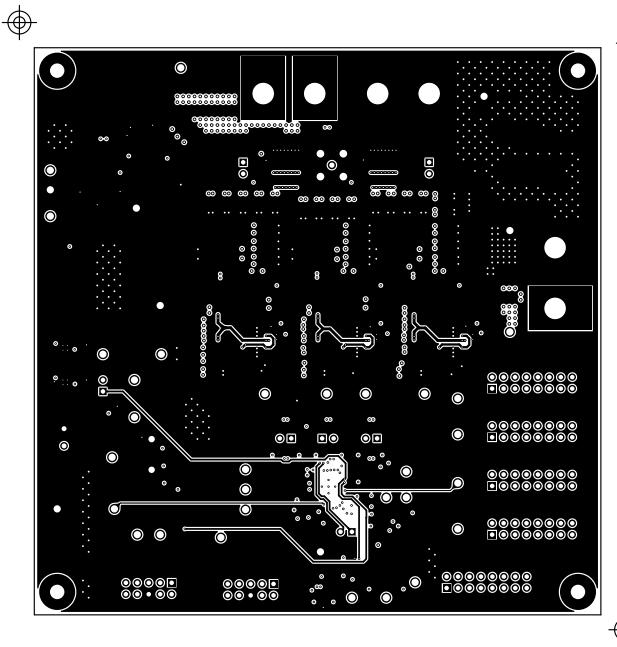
TPS59632Q1EVM-057 PCB Signal Layer 1
